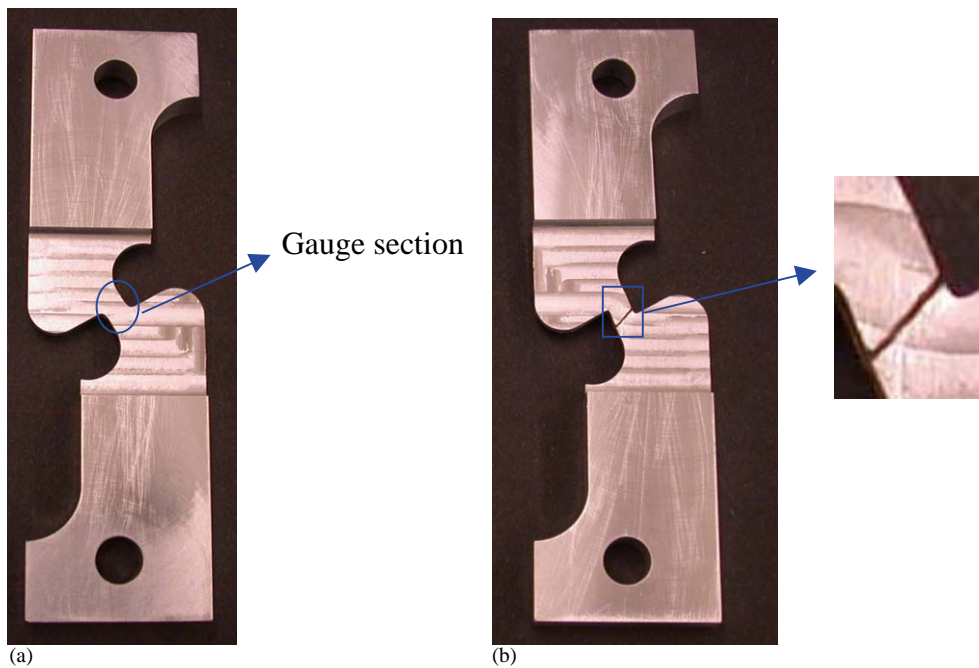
A new specimen configuration of tests under combined loadings: (a) undeformed and (b) fractured.
